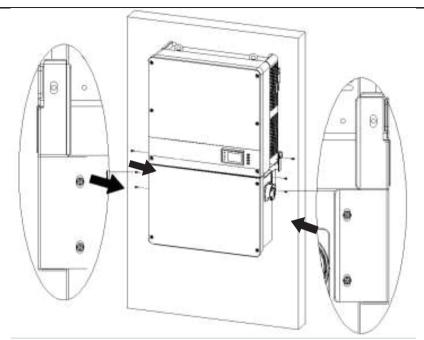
Secure the Main Section and Wiring Box to the Bracket
